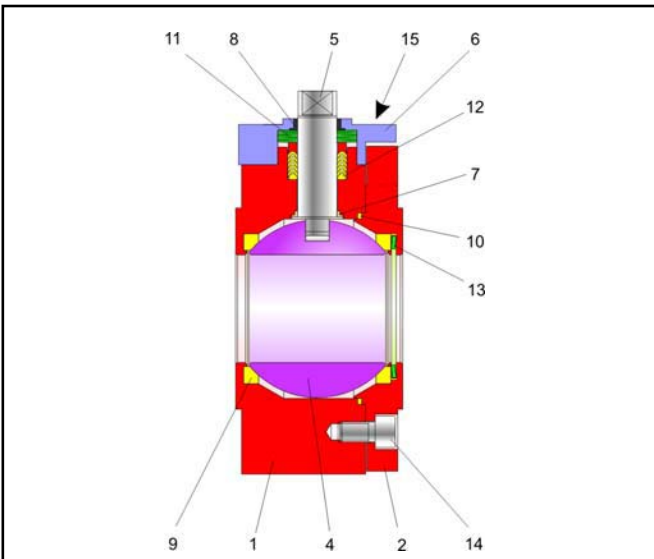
Sectional drawing of a piggable Block ball valve Series 28y
